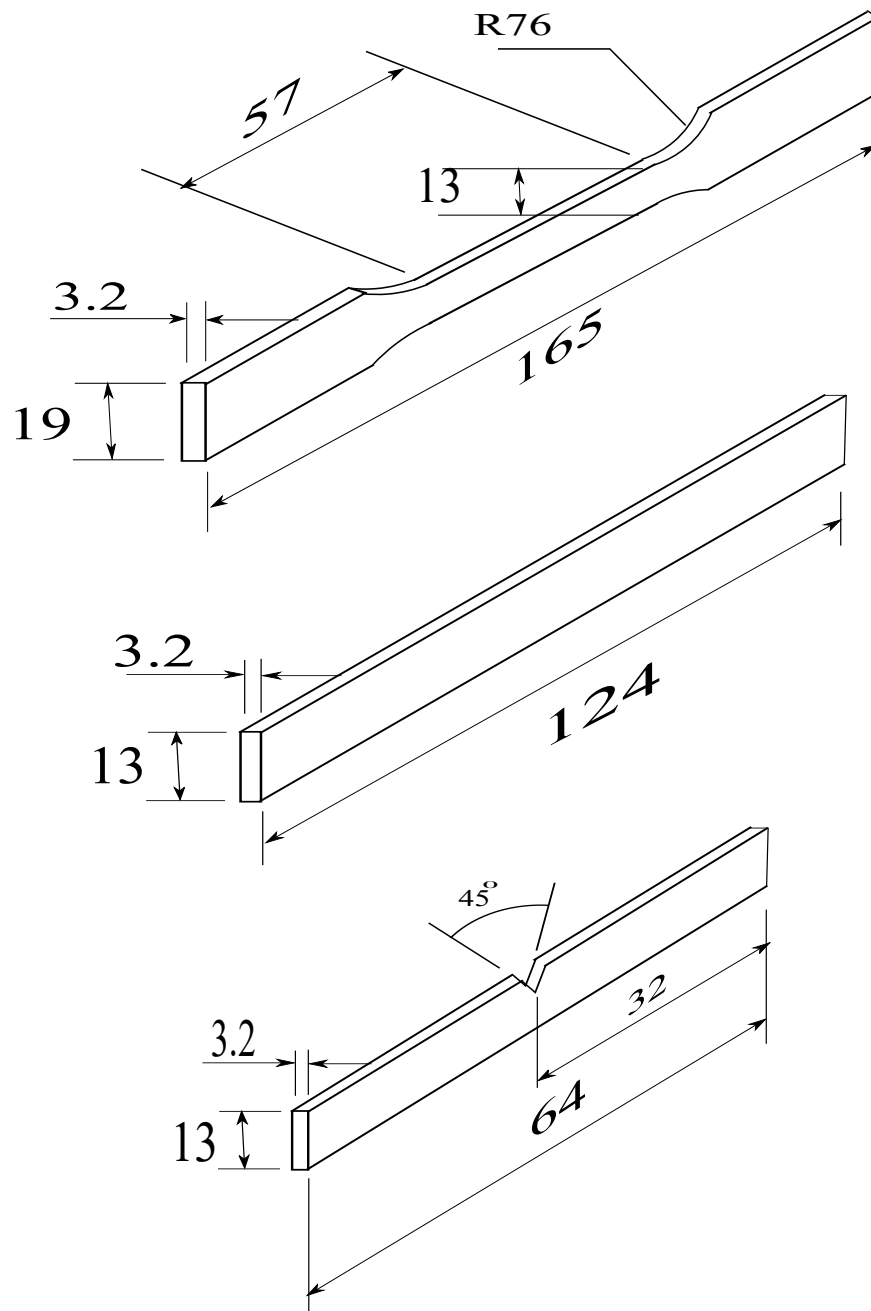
Test sample dimensions (a) Tensile ASTM D638-08:2010 (b) Flexural ASTM D790-07:2010 (c) Impact test specimens ASTM D256-06a:2010
